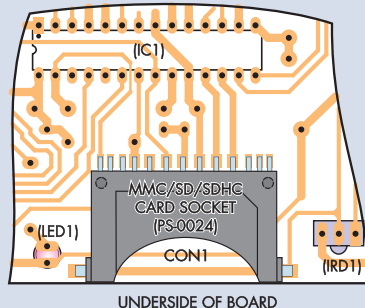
(left): the memory card socket (CON1) is a surface-mount device (SMD) and is installed on the underside of the PC board as shown here. Lightly solder tack one pin first, then check the socket's alignment before soldering the remaining pins.
